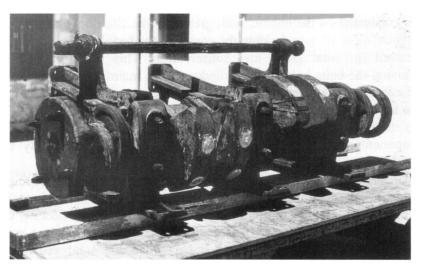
The crankshaft and web assembly. The light-colored circles or the counterweights are lead, which was poured while molten into the recesses to prevent the bolts loosening (Ray Sutcliffe).
